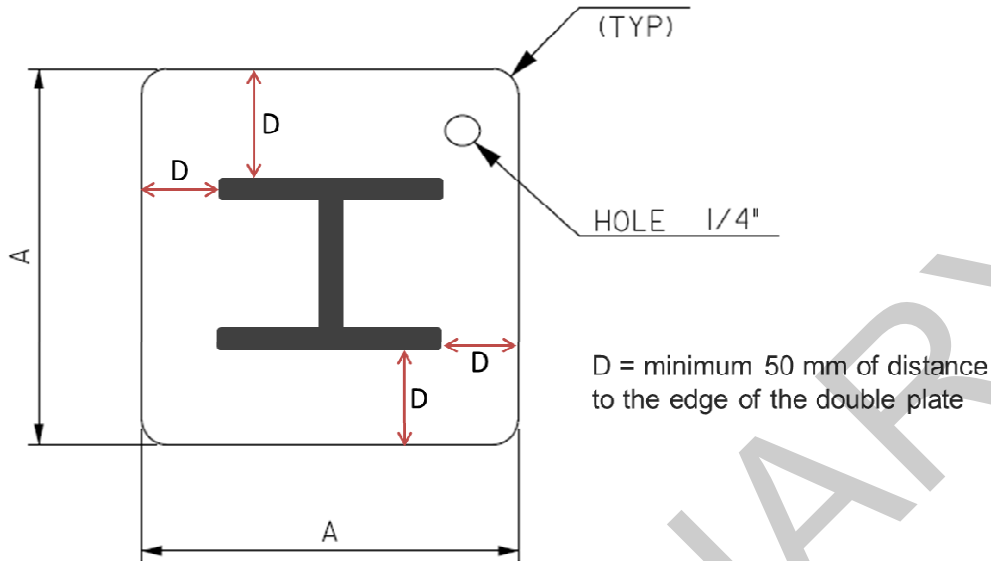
Typical double plate to protect the hull from pipe support direct weld. Dimension A will vary with support general dimensions.
